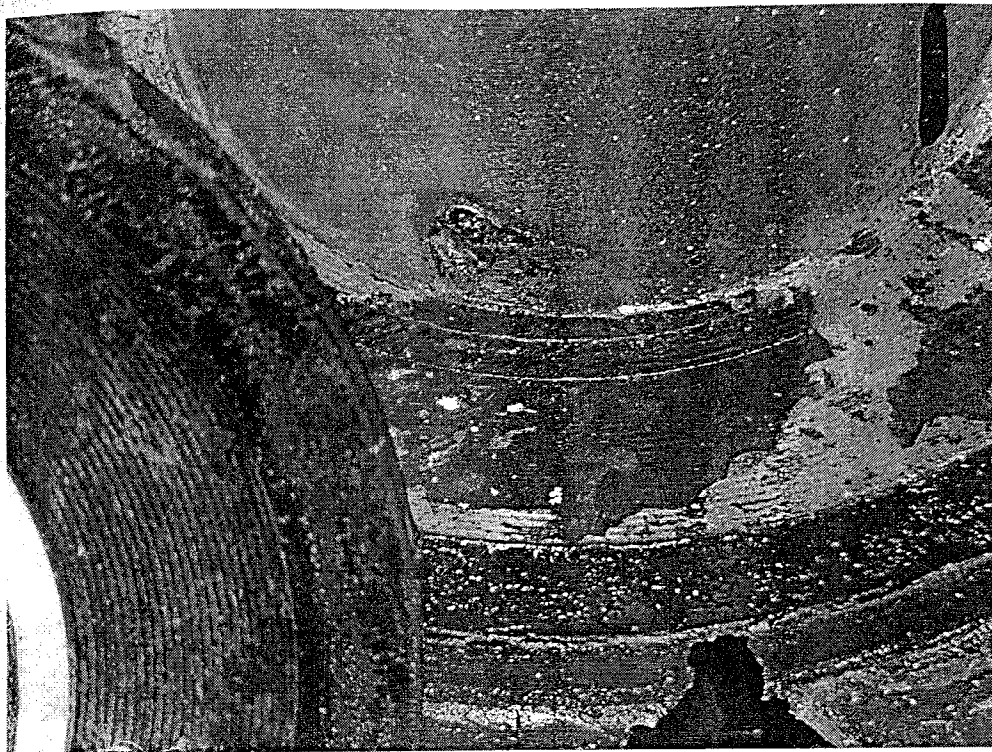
A close-up view of the Pikotek joint shown in Fig. 8 with the insulating gasket removed. Photo courtesy of Martin Winger.
